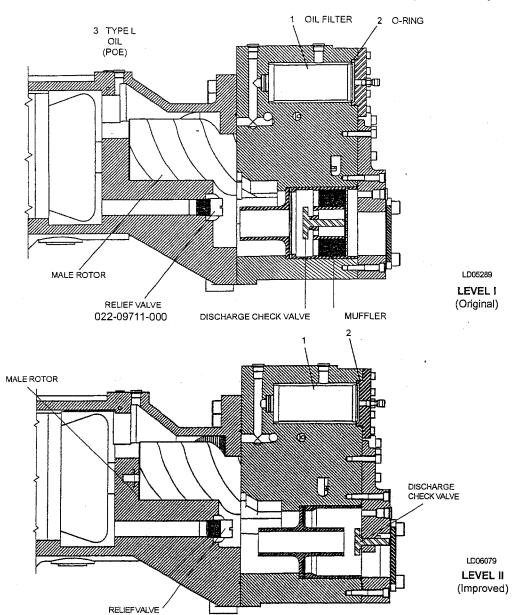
DXS COMPRESSOR PARTIAL EXPLODED VIEW
